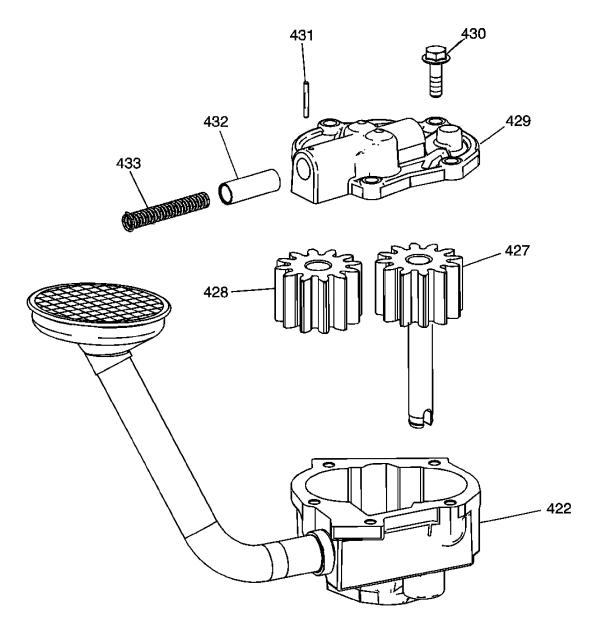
Oil Pump Assembly Disassembled View Courtesy of GENERAL MOTORS CORP.
